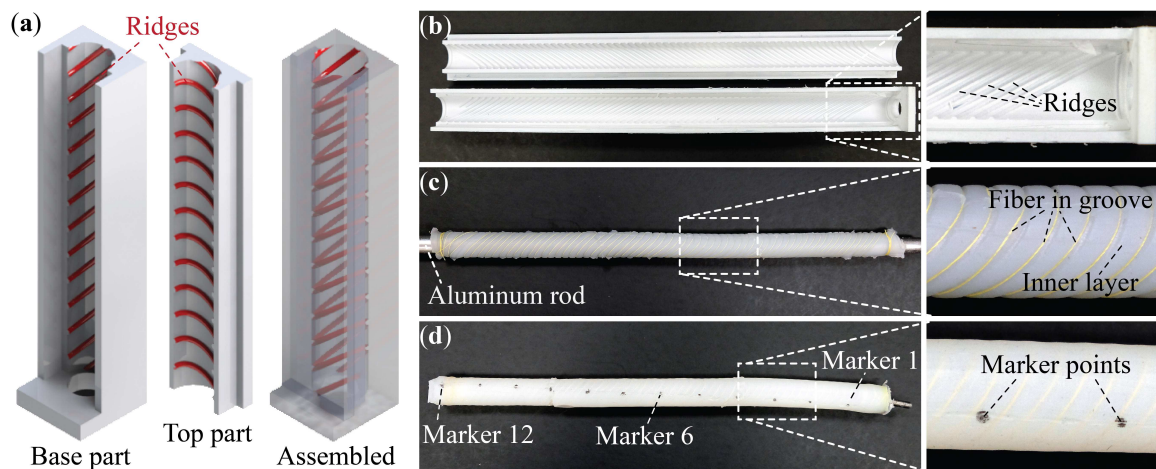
| Fabrication of the plant-inspired coiling actuator. (a) CAD models of a section of the primary molds. The ridges for fiber placement are highlighted. (b) The finished primary molds from 3D printer. (c) The assembly consists of an aluminum rod, cured inner layer, and wrapped Kevlar fiber. (d) A finished coiling actuator. The end adaptor for pressurized air supply and the markers for displacement measurement are highlighted. Note that for every marker shown in this picture, there is another one on the opposite side behind the actuator body.
